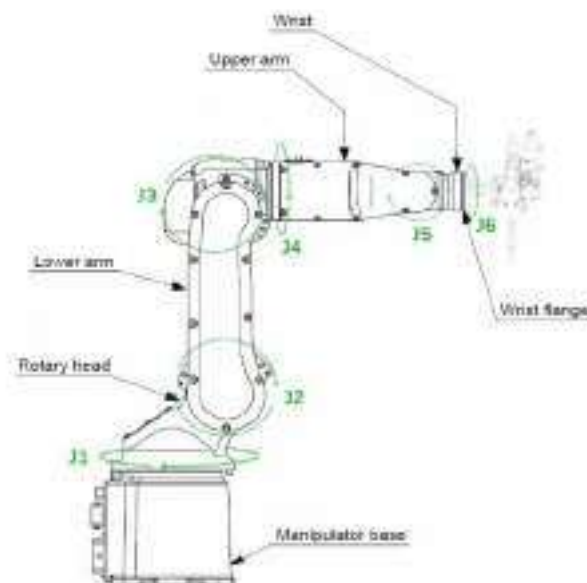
Structure of Laser Welding Robot (fortunelaser.com/tr., 2024).
